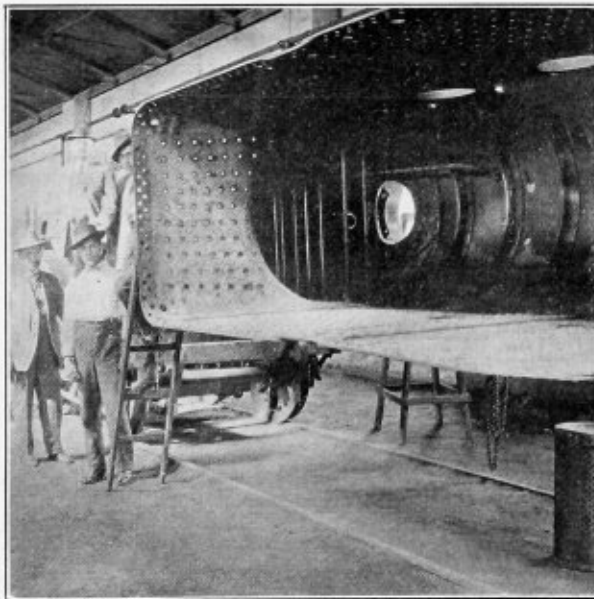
INSIDE OF BOILER (FIRE-BOX REMOVED)
